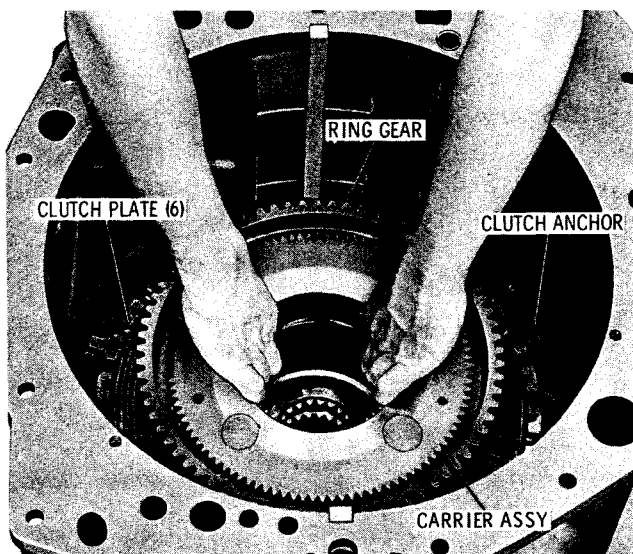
Removing intermediate-range planetary carrier assembly and ring gear
